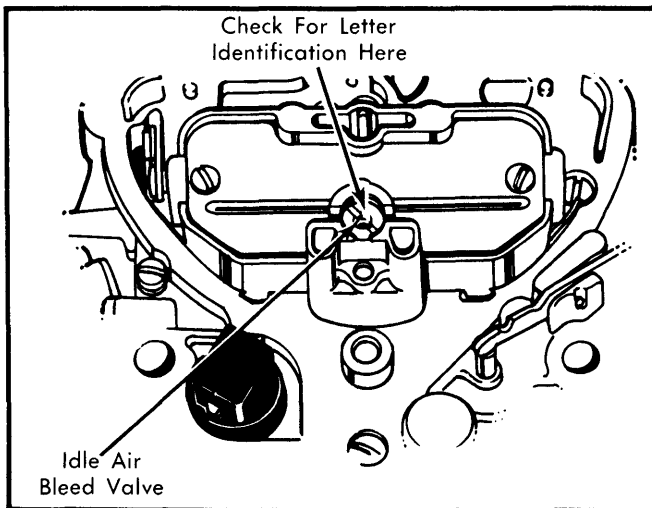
Location of Idle Air Bleed Valve and Identification Letter
